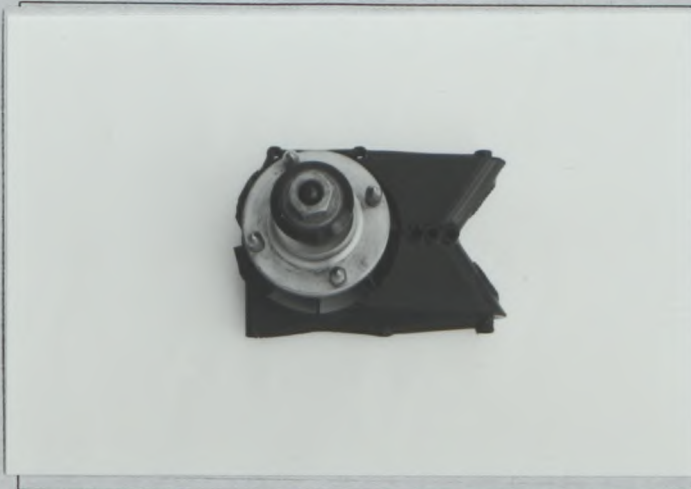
ADJUSTABLE STABILIZER ASSEMBLY
